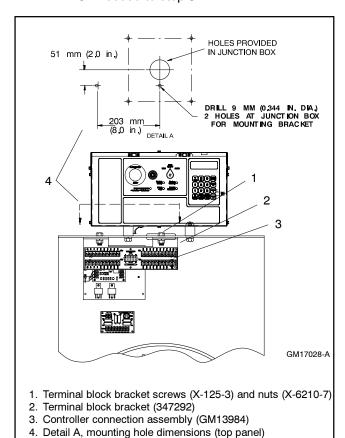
Terminal Block Bracket and Controller Connection Assembly Mounting (350/400 kW)
